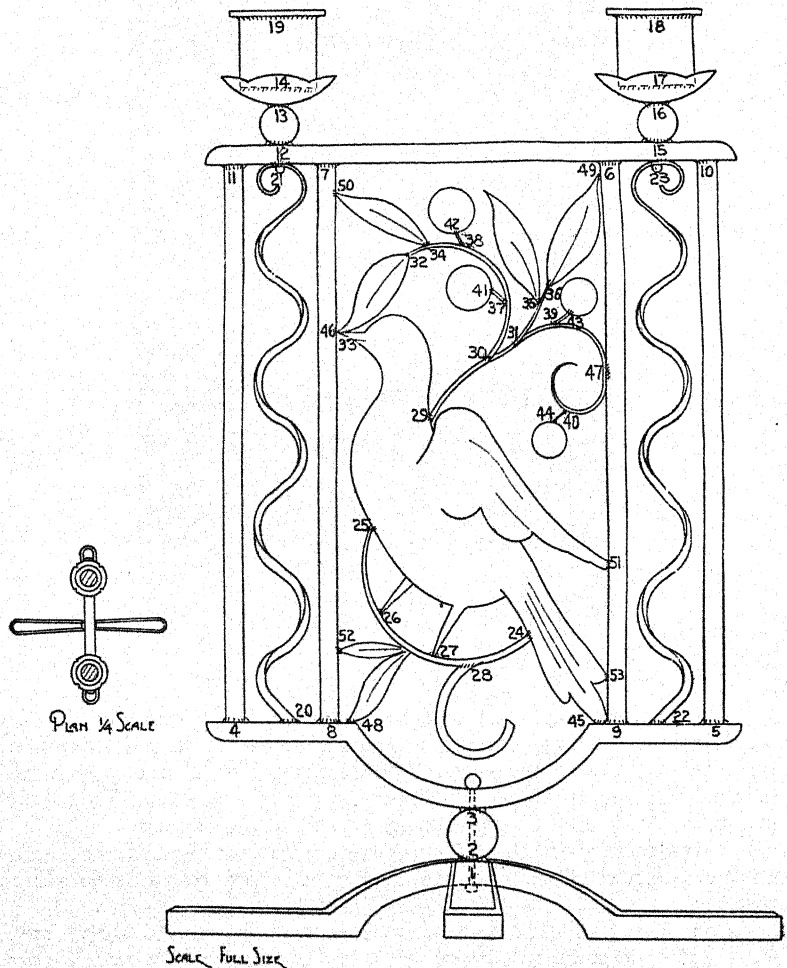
Sketch of candlestick. Numbers indicate location and sequence of welds.
